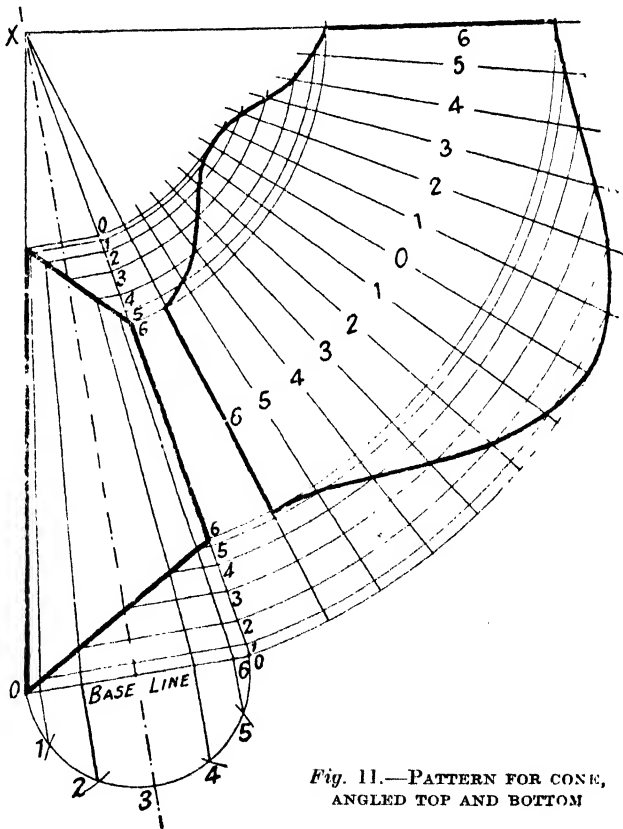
PATTERN FOR CONE, ANGLED TOP AND BOTTOM
